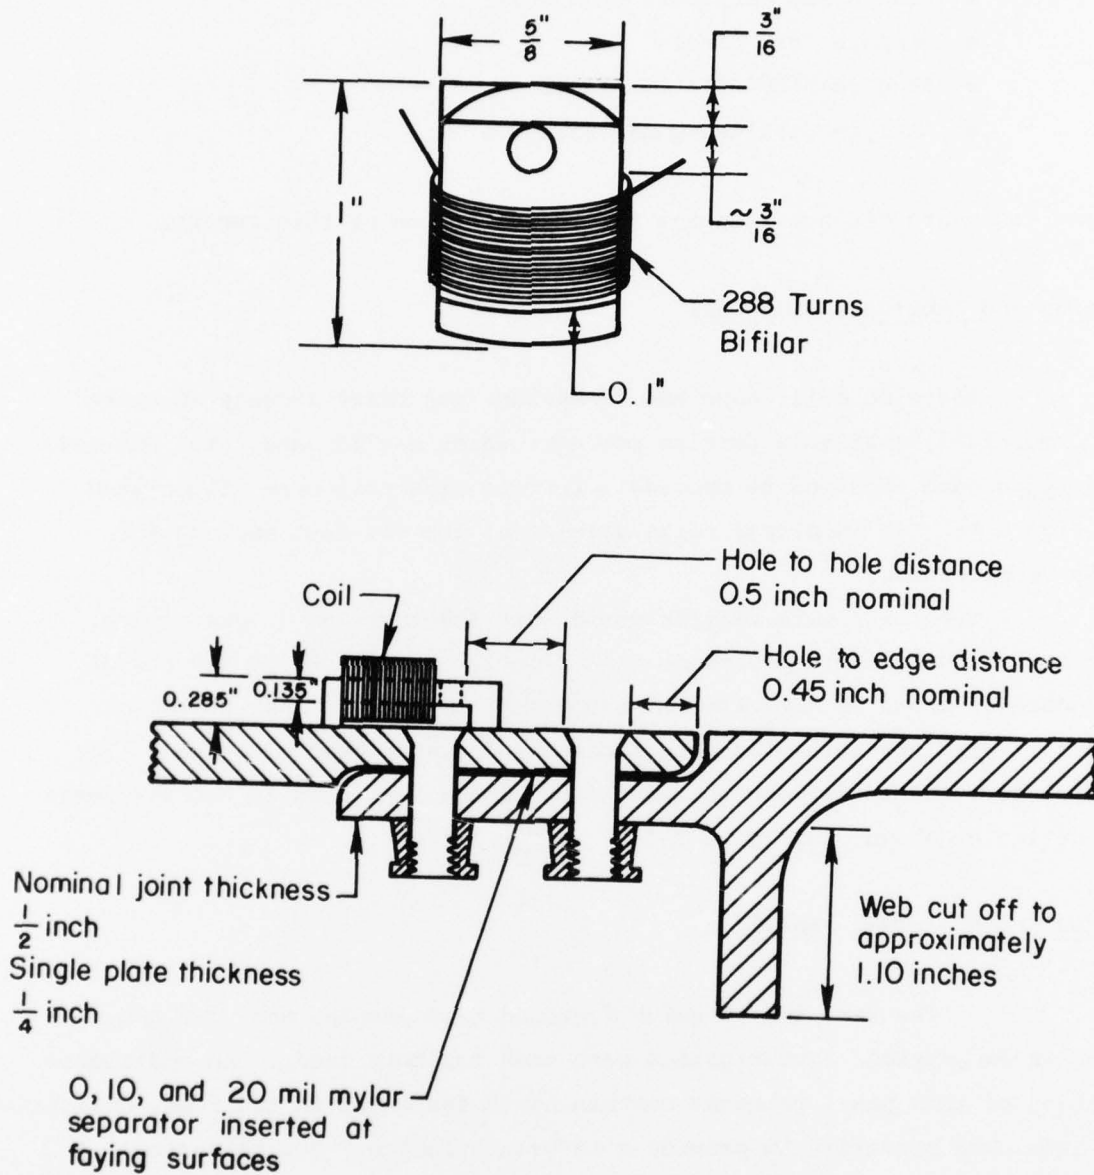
BOTTOM VIEW OF SIDE COIL (TOP) AND SIDE VIEW OF SIDE COIL (BOTTOM) IN POSITION FOR TESTING FASTENER
